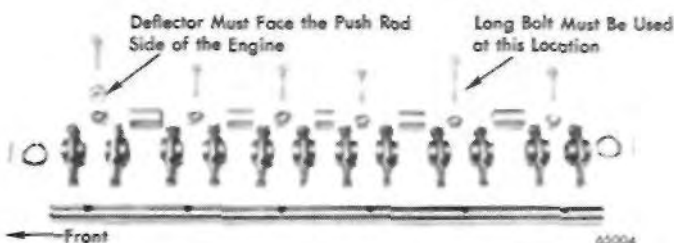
Rocker Arm and Shaft Assembly — Disassembled View
